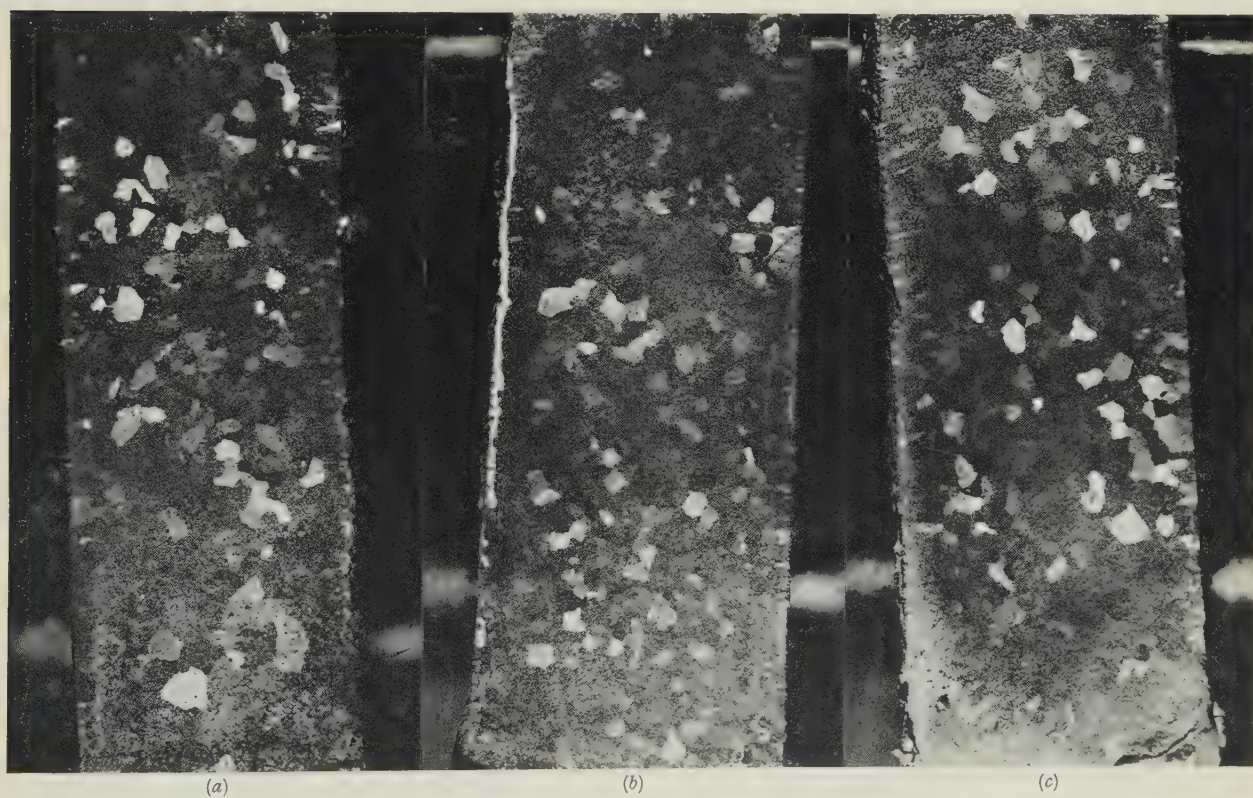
Lead Cast Against (a) Untreated Face; (b) Face Coated with Aluminium; (c) Face Coated with Copper.
